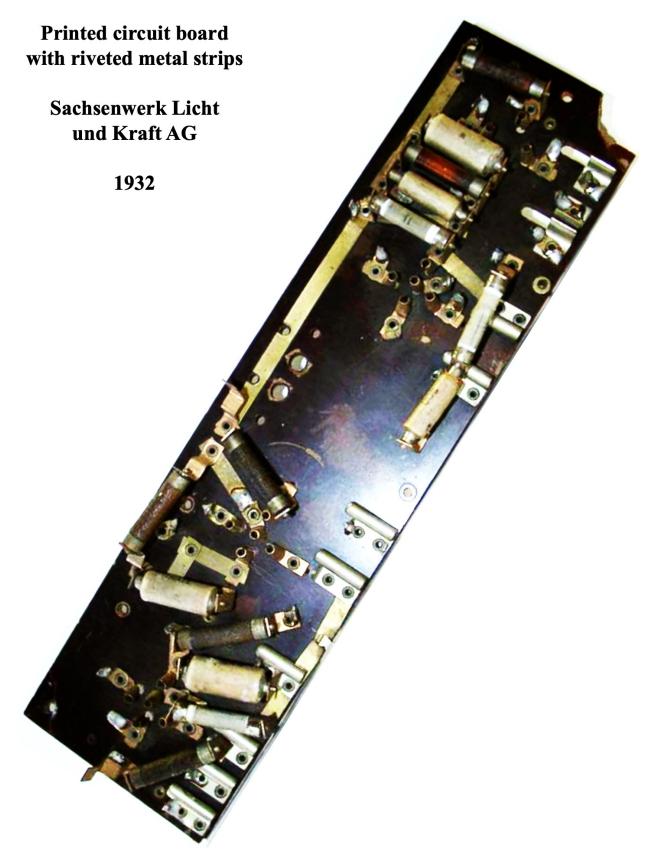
Printed circuit board with riveted metal strips, Sachsenwerk Licht und Kraft AG, 1932.
